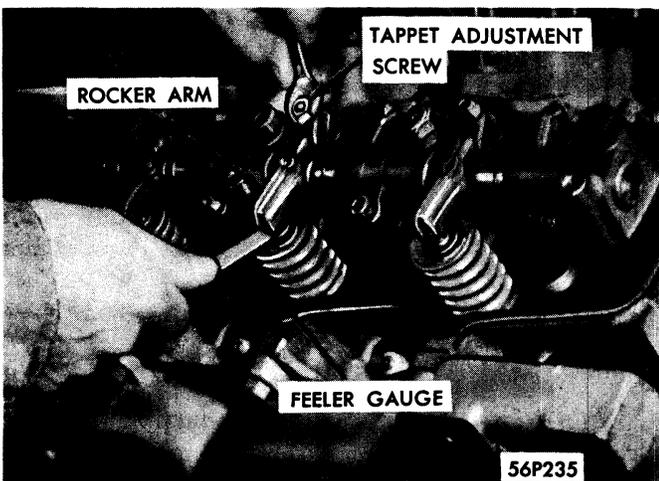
Adjusting Mechanical Tappets—277, 301 and 318 Cubic Inch Engine
